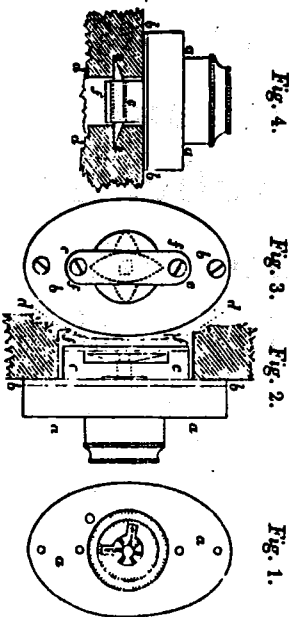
is the top or front of the lock; fig. 2 a side view; fig. 3 a back view; and fig. 4 an end view. *a a* the cap or case; *b b* the back plate, from which rises a projection or pipe *c c*, formed to enter a key-hole with but little shake: fig. 2 shews it merely introduced but not secured in the key-hole *d d*, which is in section; fig. 4 shews it secured.
